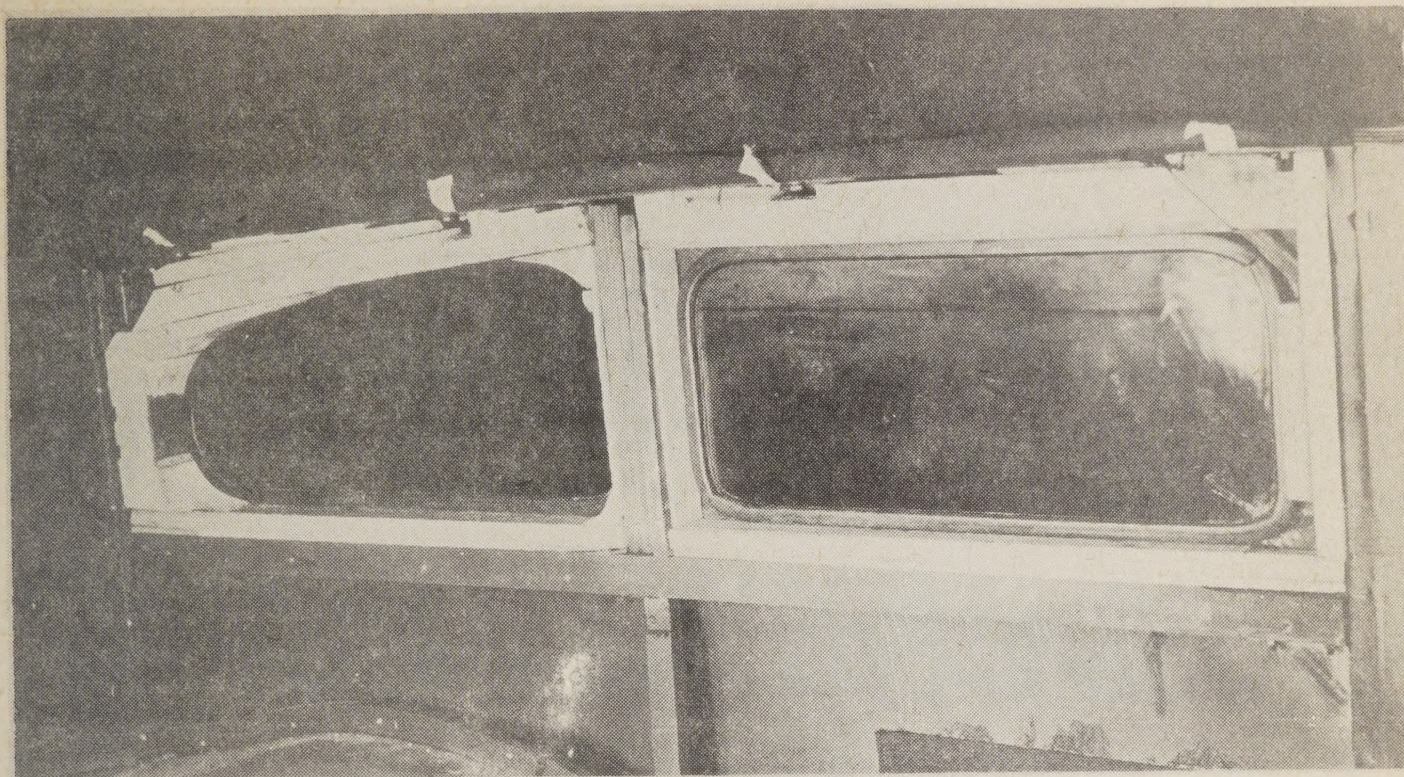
New casing around rubber on inside of panel to replace bracing and provide solid backing for tacking fiberboard wall and trimming at window sill.
